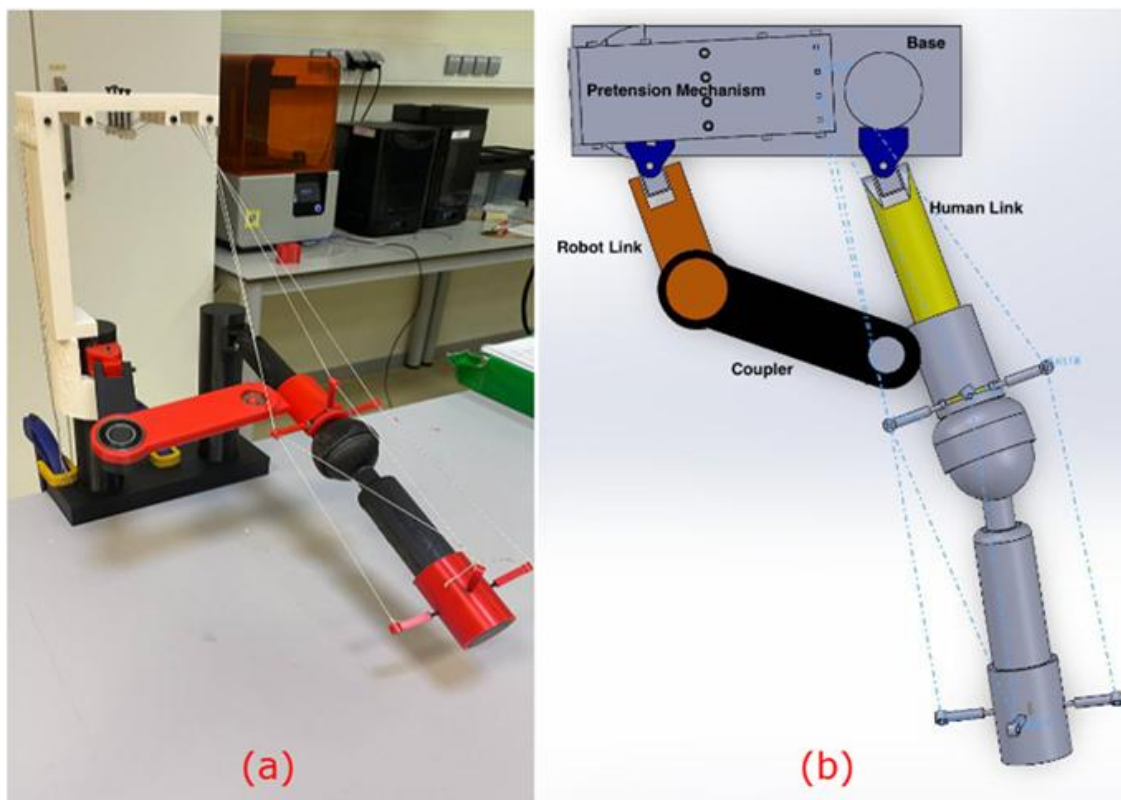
3D Printed Mini-prototype and Cad model of hybrid shoulder exoskeleton [22]
